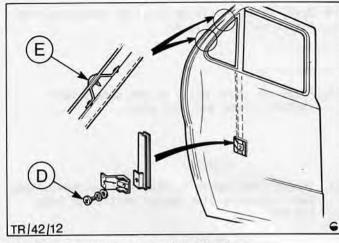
Remove door quarter light. D - Mounting on inside door panel E - Mounting on door window frame
